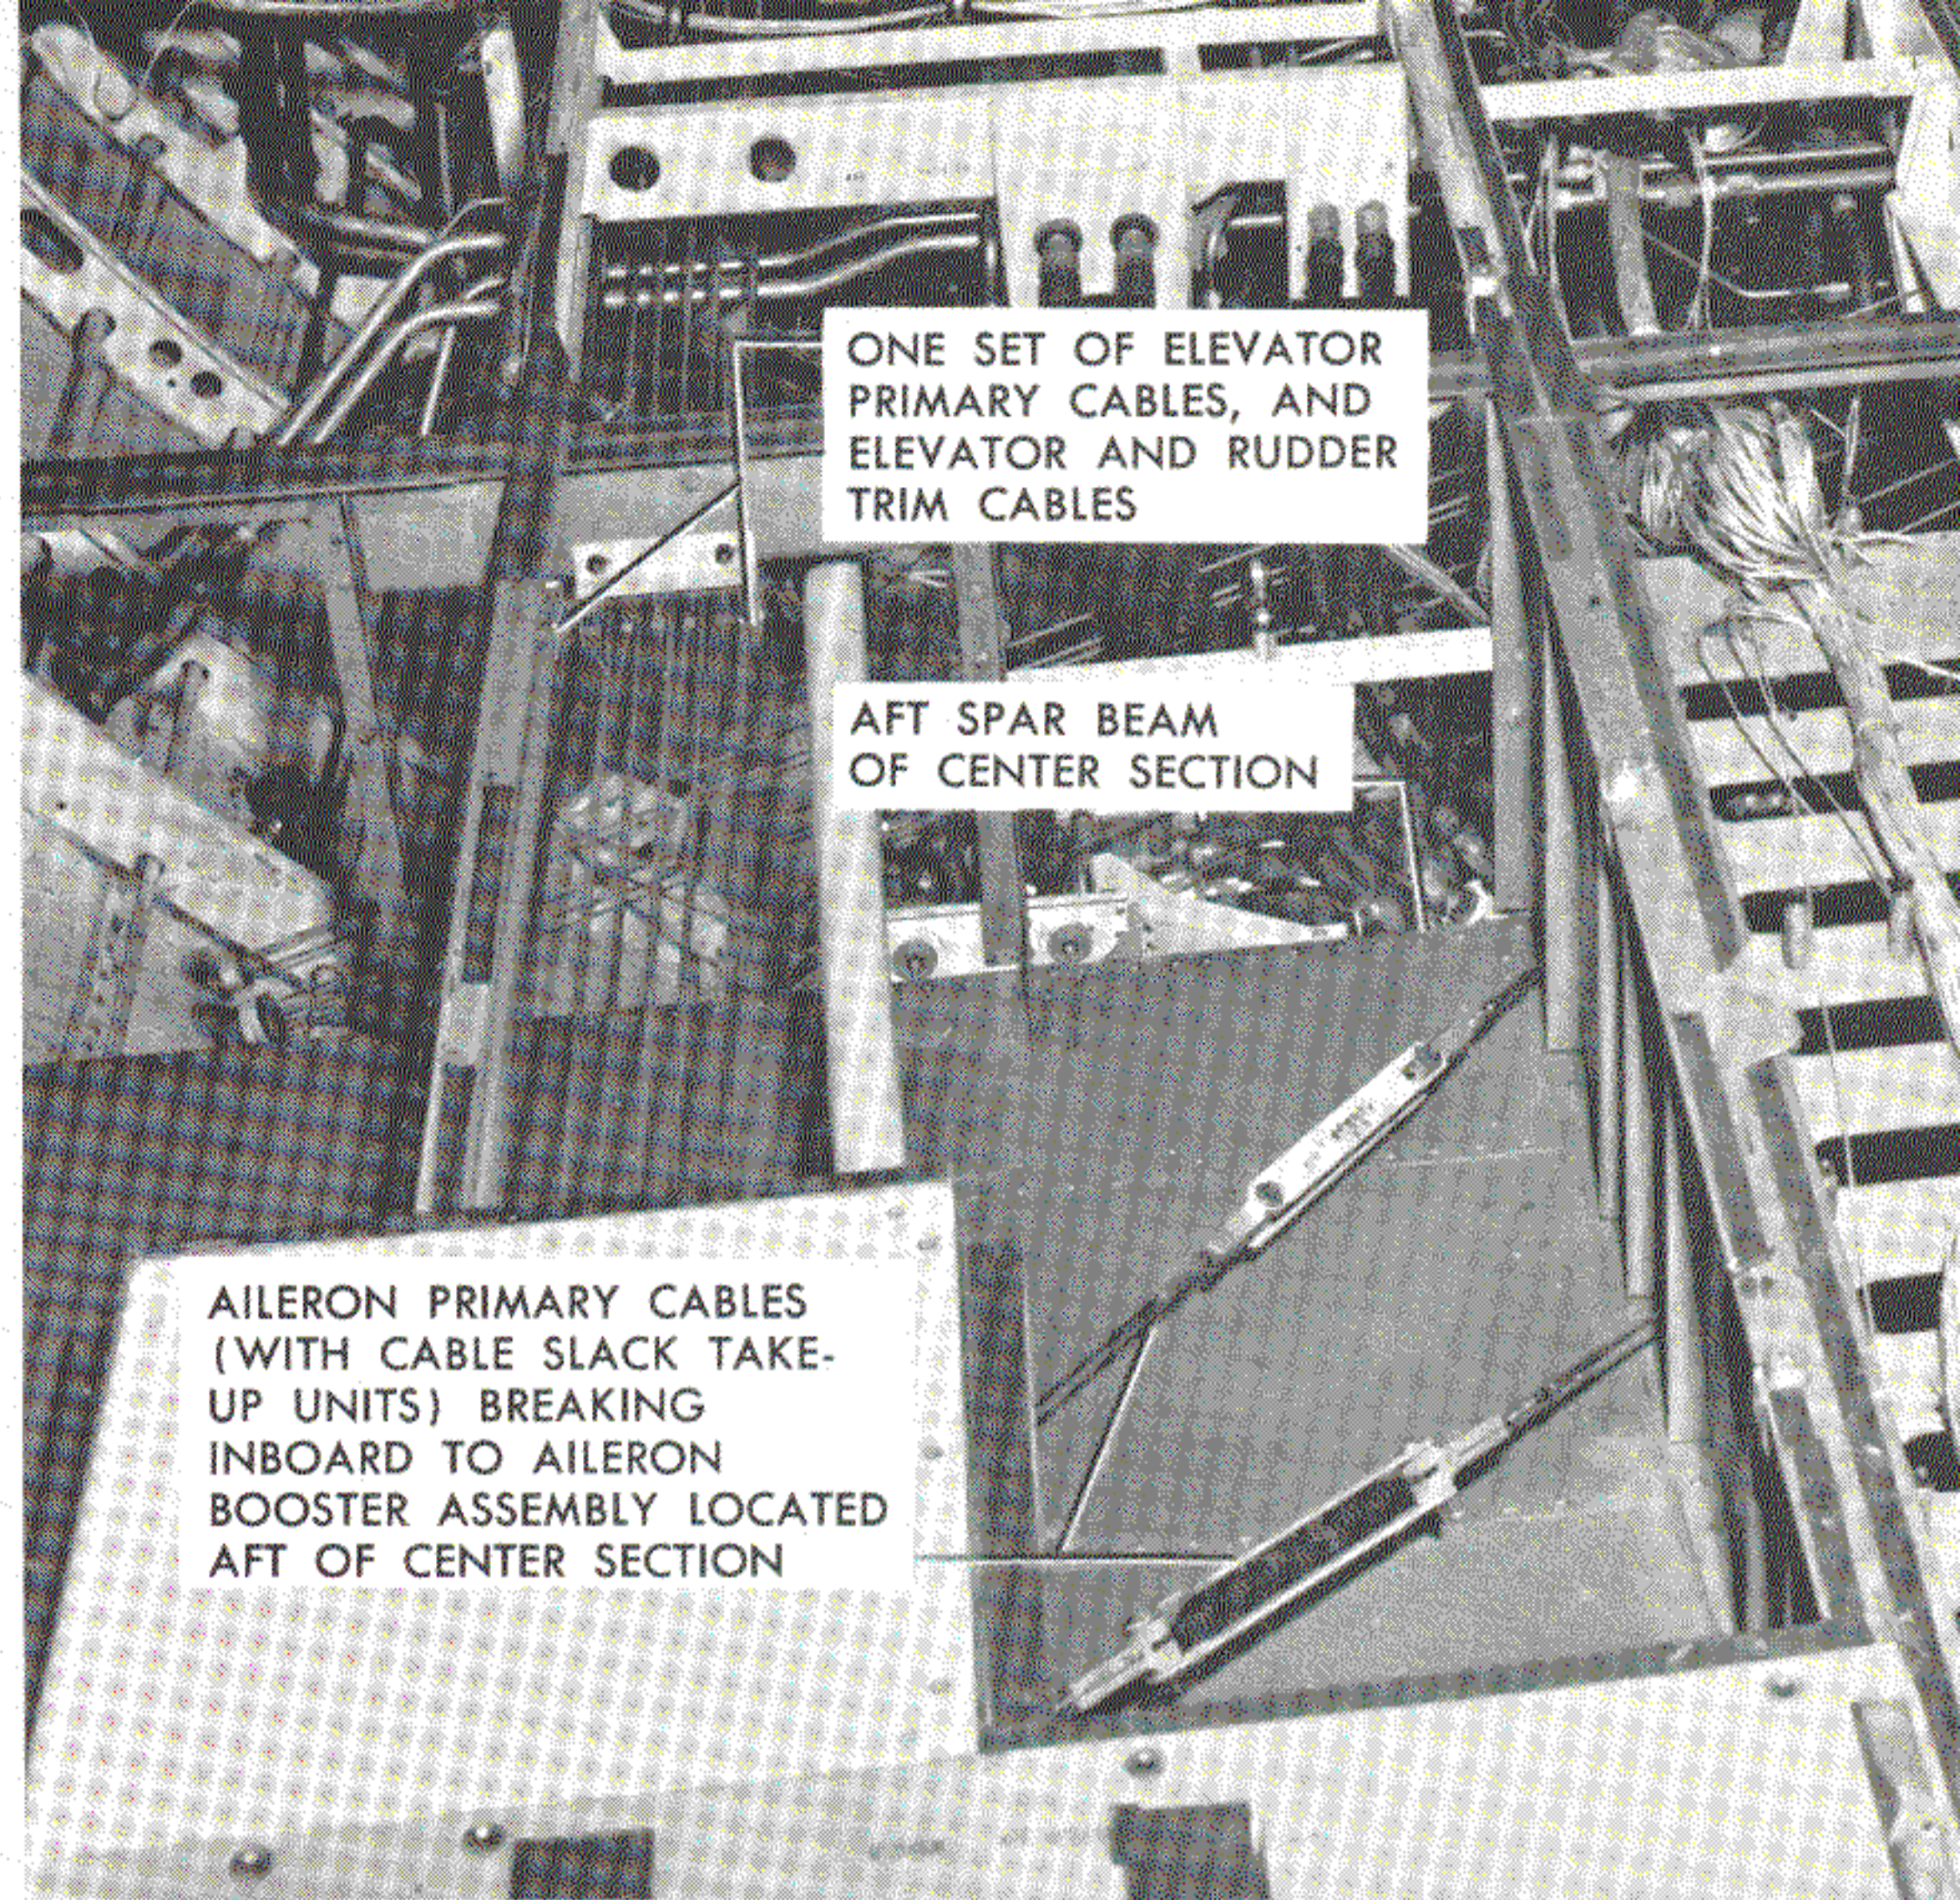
View Looking Aft Below Cabin Floor Showing Typical Installation of Cable Slack Take-up Units — Electra installation shown; Orion is similar
